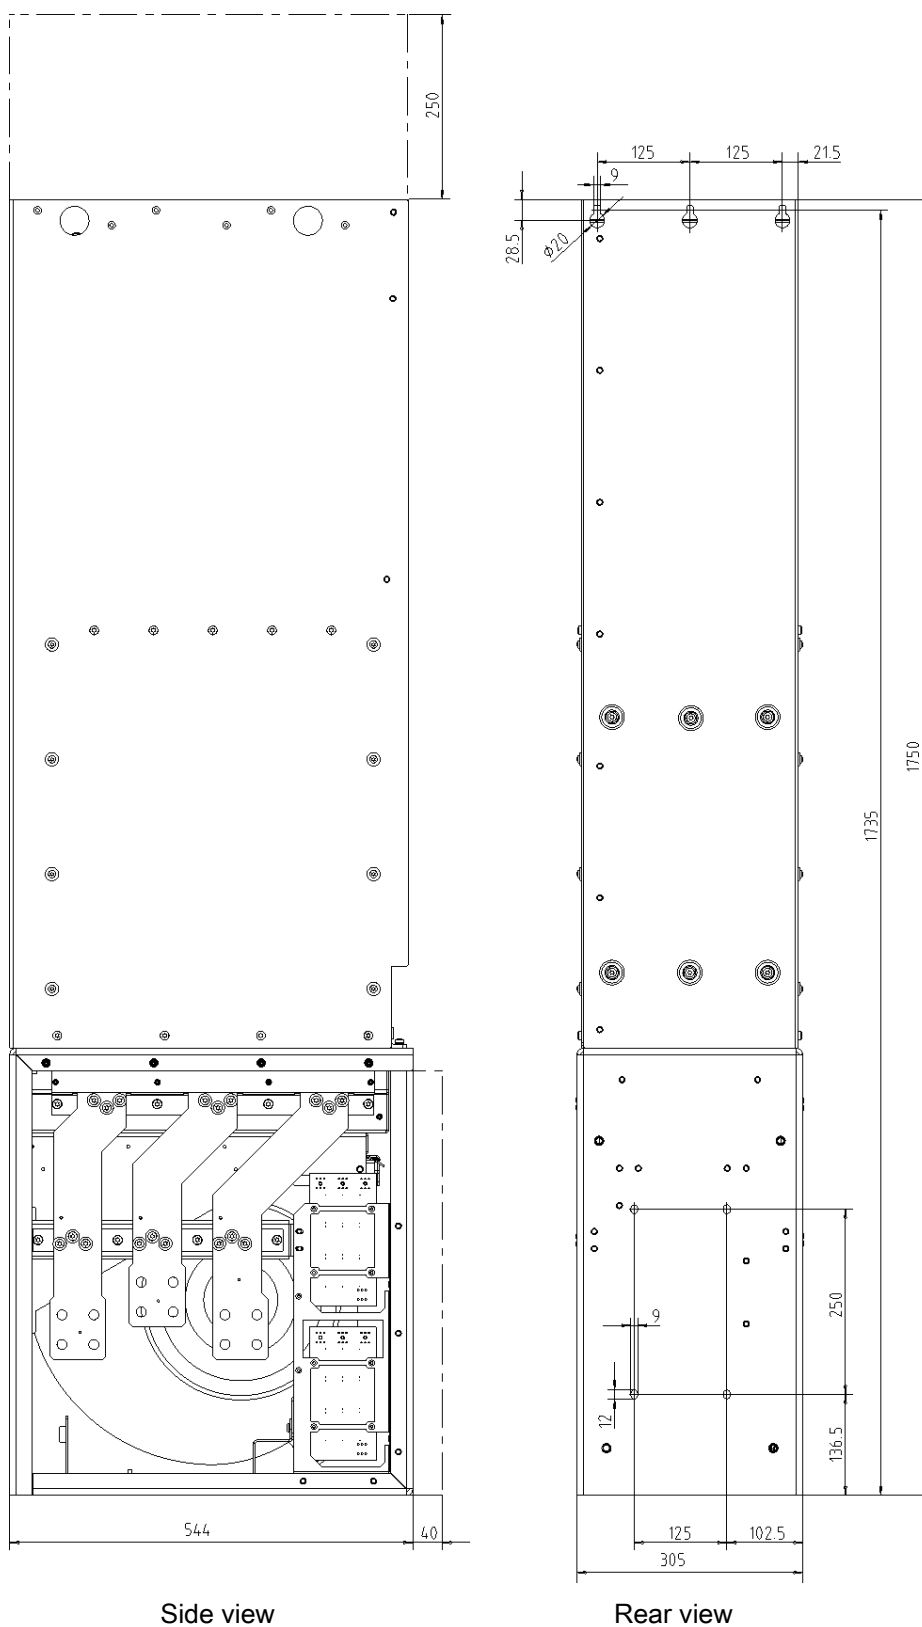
Dimension drawing of the Active Interface Module (type HI)
